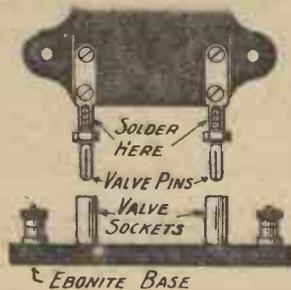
The valve pins should be soldered to the lugs of the fixed condenser.
